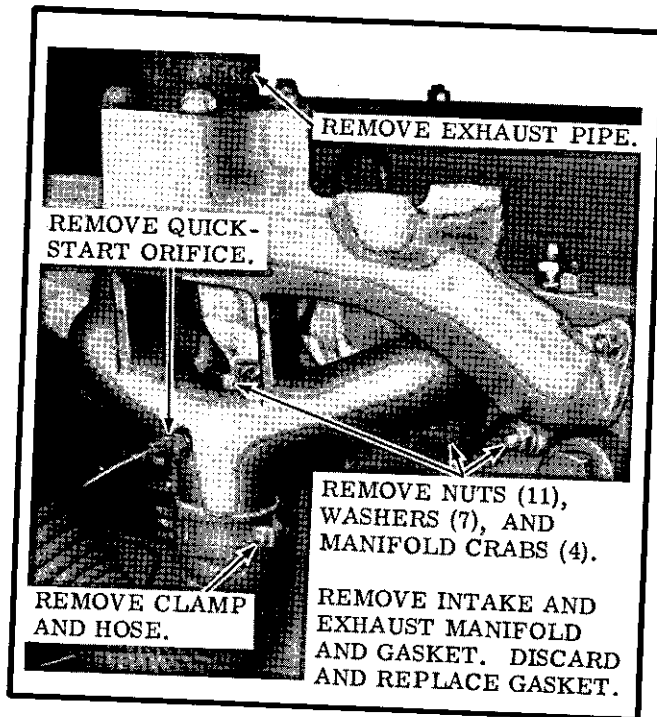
Intake and Exhaust Manifold, Removal and Installation
